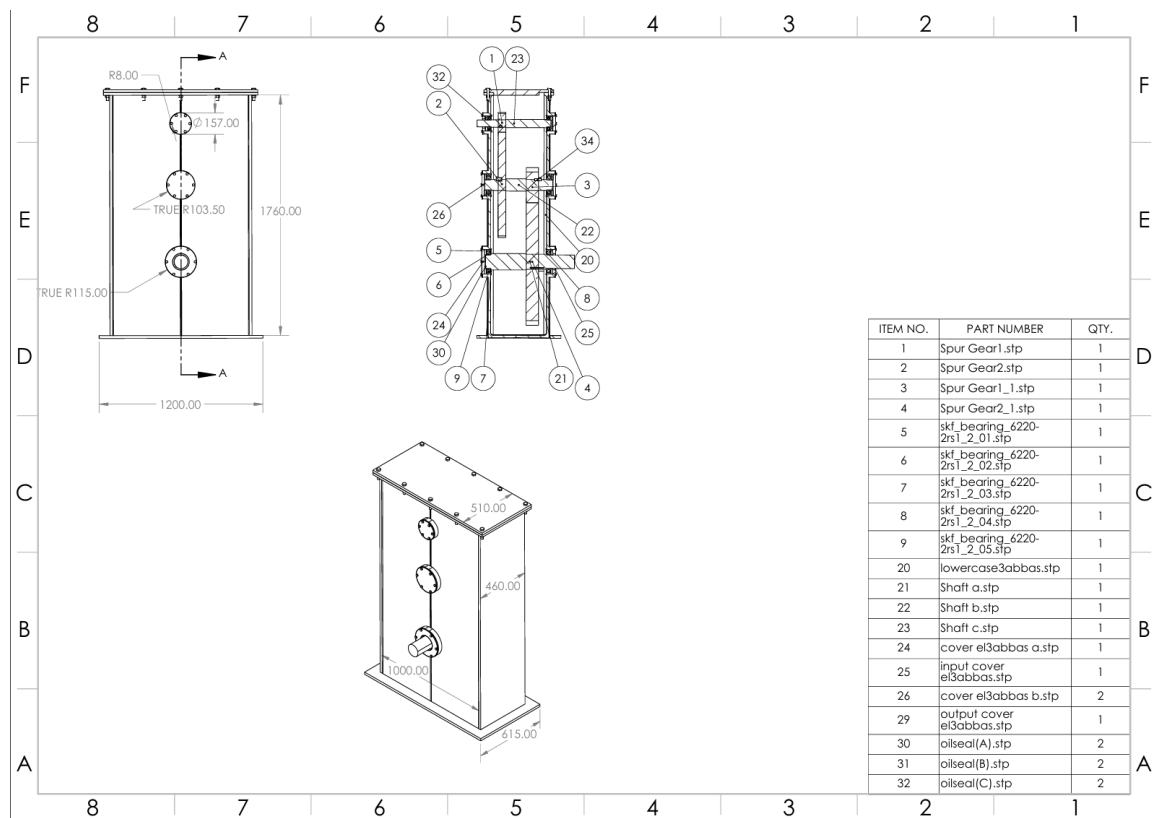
Final assembly; front, section side, and isometric views. Displayed on SOLIDWORKS 2021.
